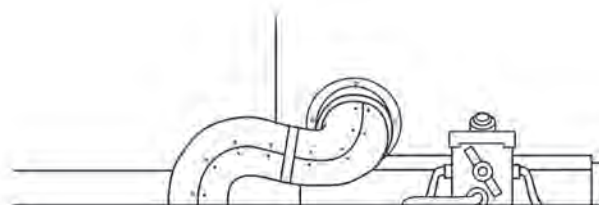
Modified outside steam pipe, replaced original 'straight' pattern following incidences of fractures. Mechanical lubricator in final forward position.
